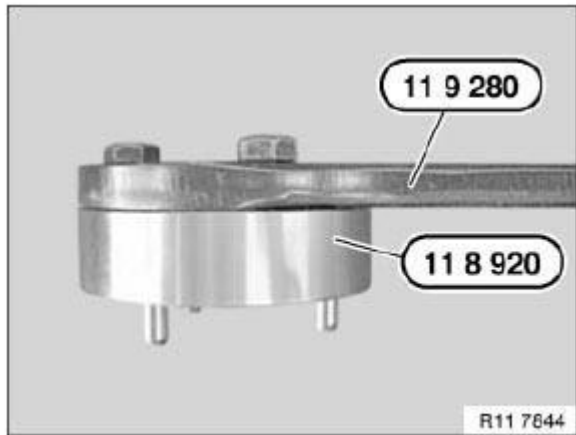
Identifying Special Tool 11 8 920 On Special Tool 11 9 280
